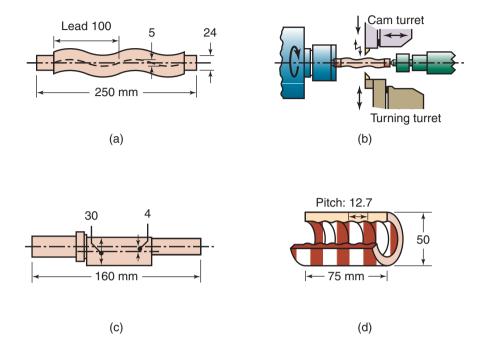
Examples of complex shapes that can be produced on a CNC lathe.
